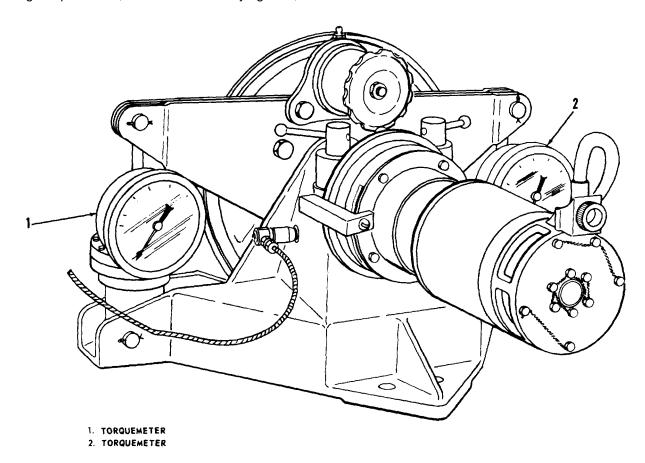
Starter Torque Tester (Actuator Mounted for Testing)
